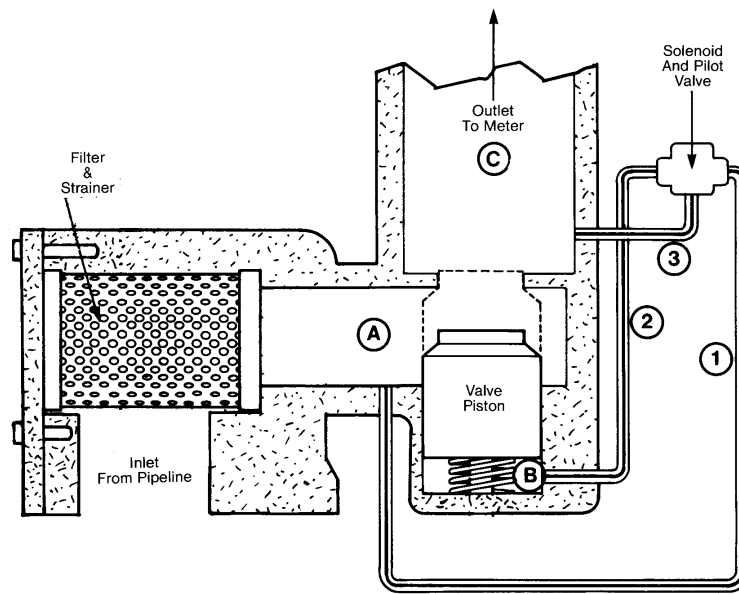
REMOTE-DISPENSER CONTROL VALVE
